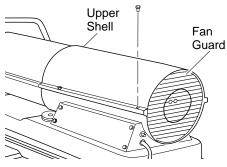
Upper Shell Removal, 110/150,000 BTU/Hr Models
